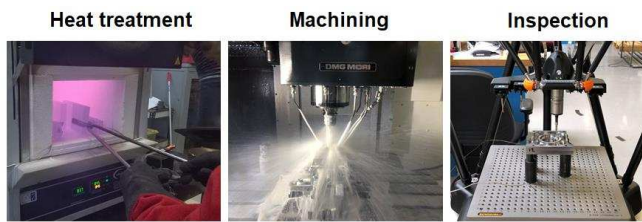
Heat treatment, machining and inspection processes.
